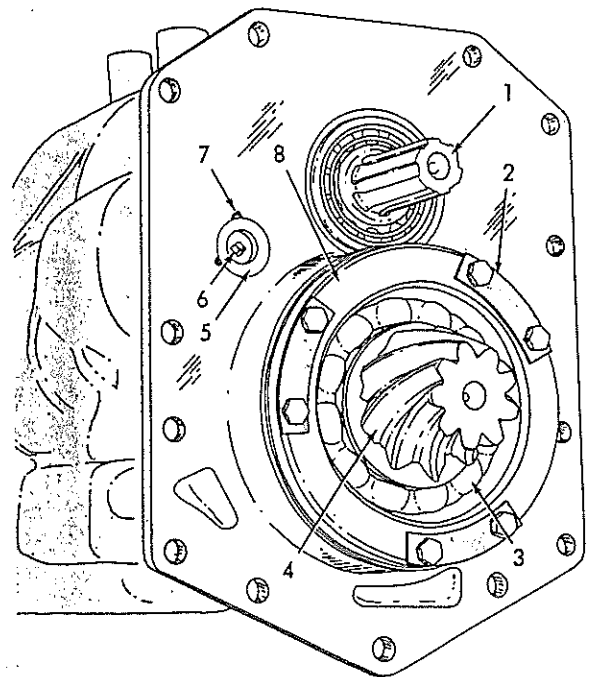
Transmission Shafts Installed - Rear View (T-72011)
